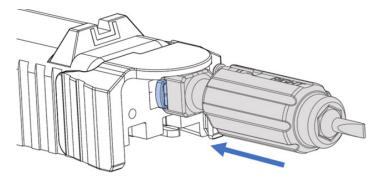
Positioning and direction of the Assembly Tool for RDC coil assembly.
